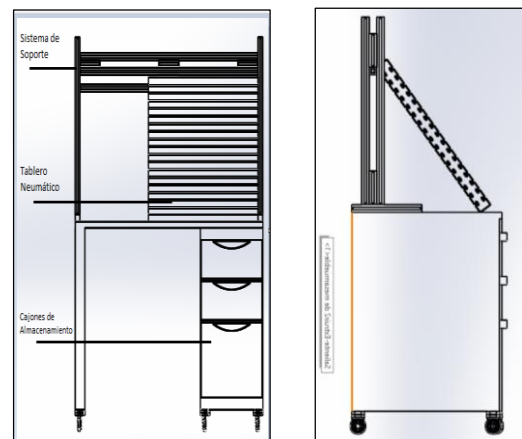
Frontal and Side Sight of the Didactic Pneumatic Board.
